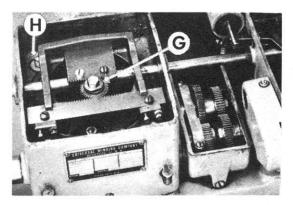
With screw (E in Fig. 2) removed and pinion (G) in place, traverse length can be varied from 1-1/2 in. to 2-13/16 in.
